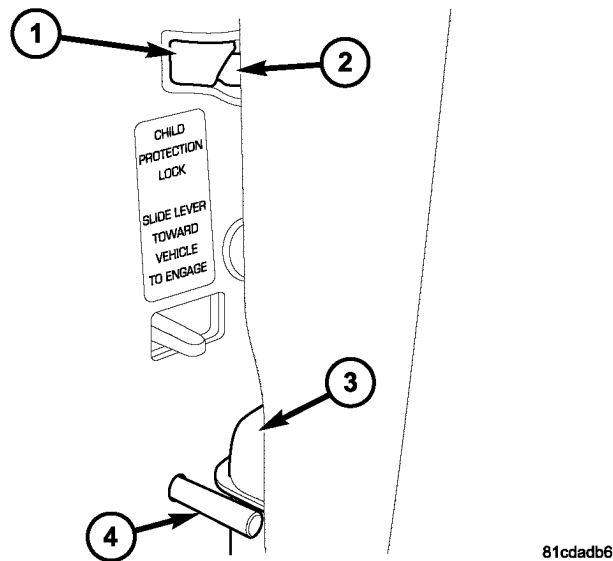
LEFT LATCH AND FUEL DOOR BLOCKER
